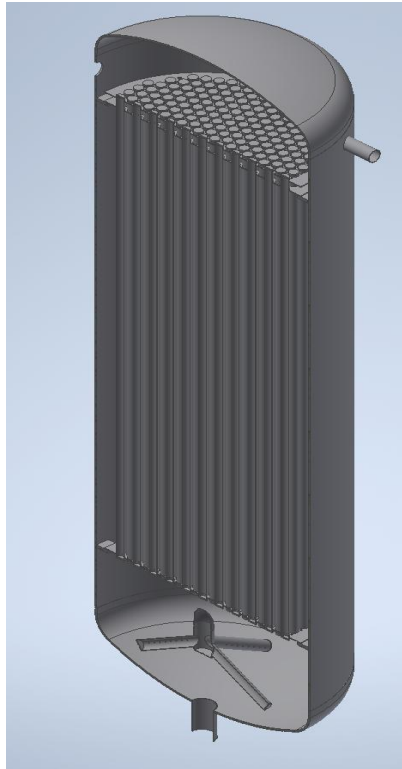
Section view of the LHTES 3D drawing showing the pressure vessel and the PCM tubes. Connections at the top and bottom show the steam supply and outlet ports.
